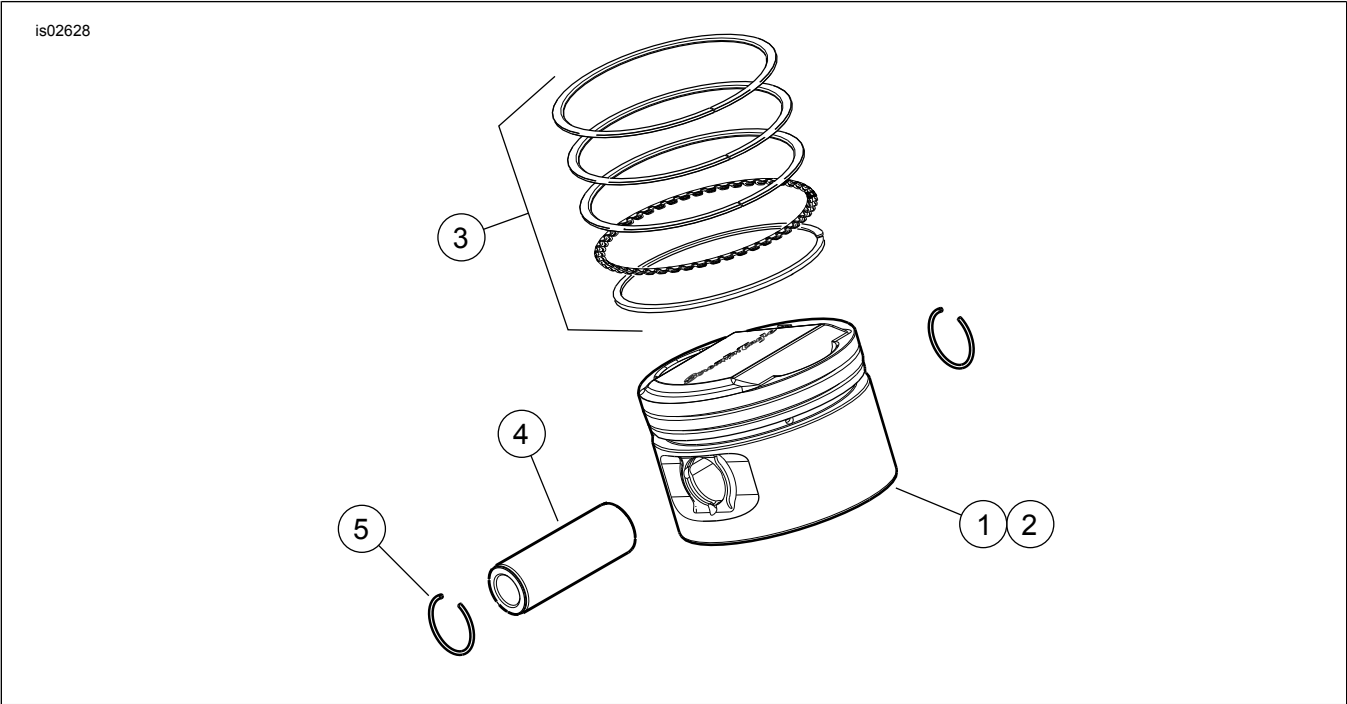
Service Parts: Screamin' Eagle Twin Cam (103 cu. in. Heads) Stroker Forged Piston Kits
